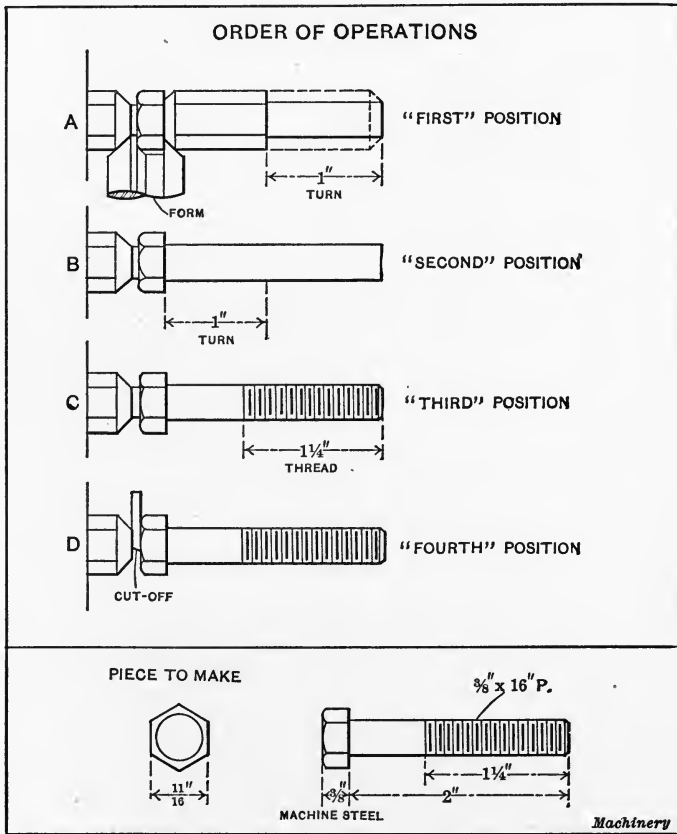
Successive Operations for Producing a Hexagon-head Cap-screw on a Multiple-spindle Machine
